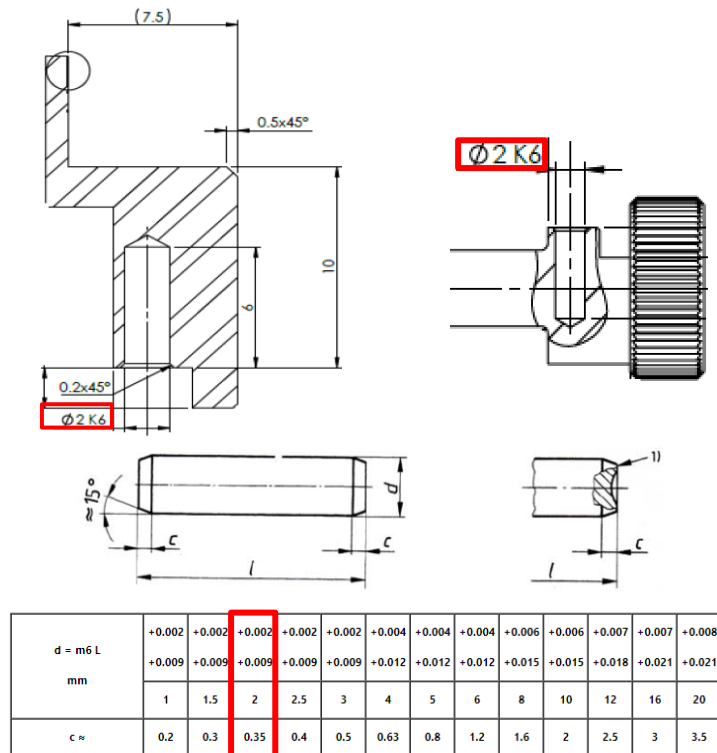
Dimensional tolerances of parts involved in blade adjustment (source: [26])
